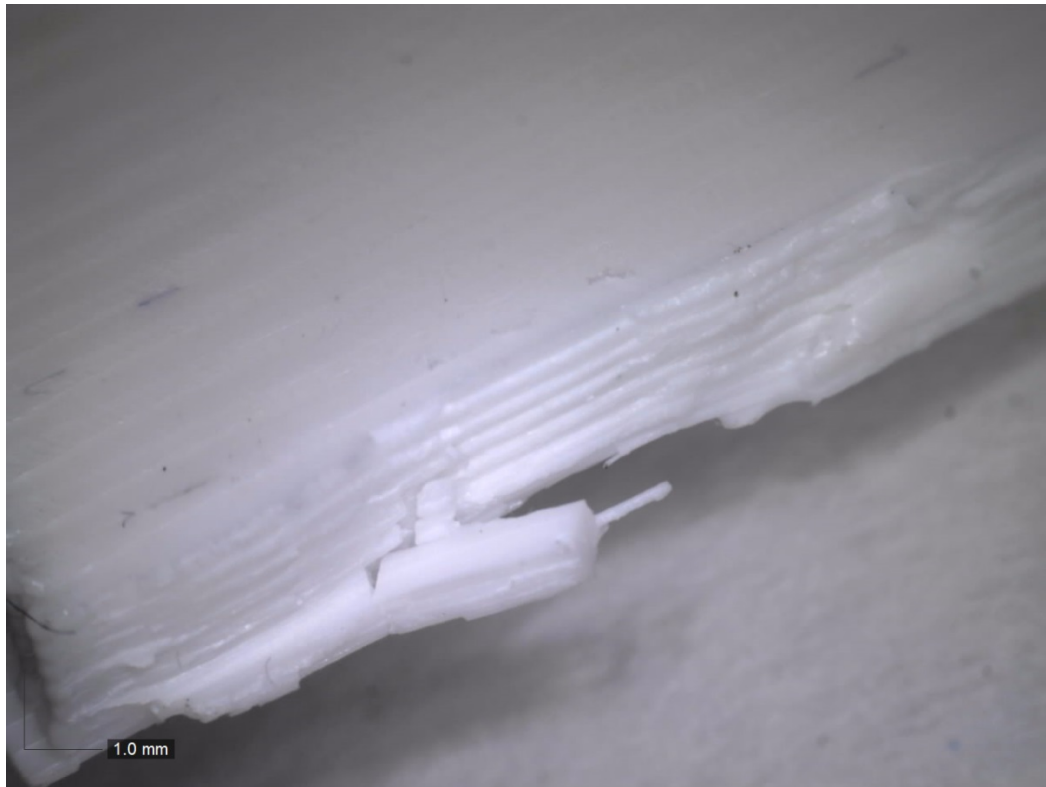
Fracture surface of B1 sample made of PLA with double-weave (side view)
